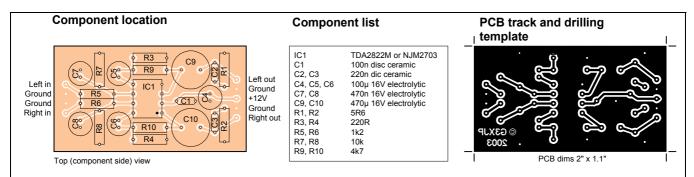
Double-sided stereo amplifier PCB. This is a 'conventional' board with components mounted on the top, the track underneath. The component side is completely unetched. No connectors are specified, but the relevant pads have a 0.1" pitch.
